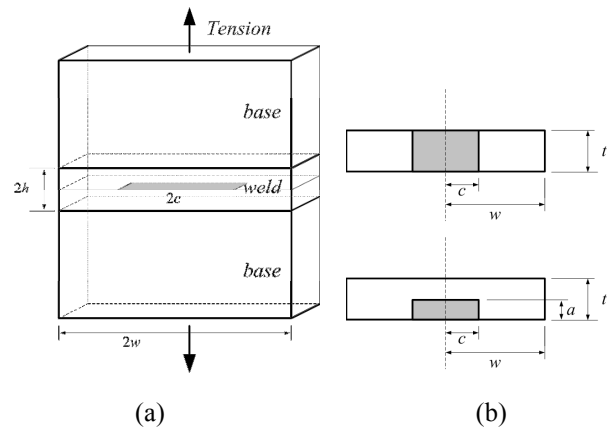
(a) Schematic illustration of a similar welded plate under tension. Crack is located at weld-center. (b) Crack shape considered in the present work : through-wall crack and part-through surface crack.
